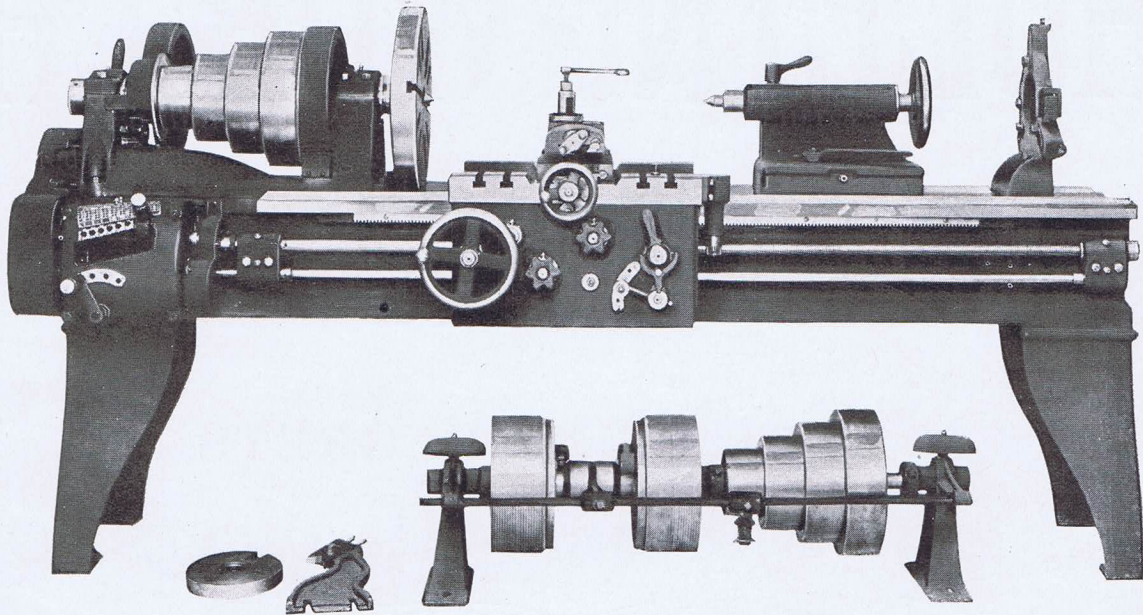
' x 6-8-&-10 foot Standard Cone Head Lathes.
